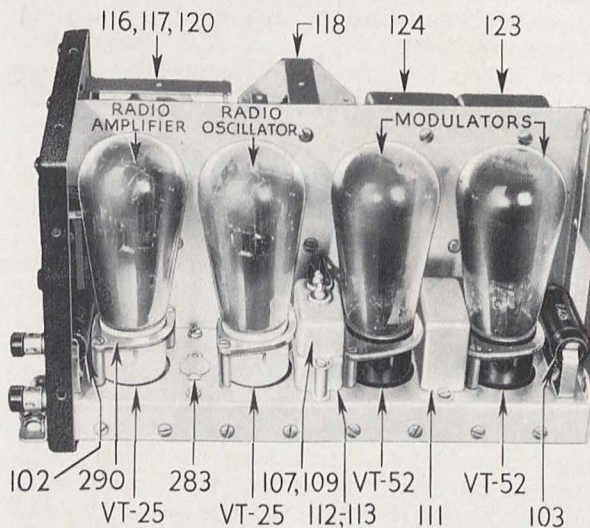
RADIO TRANSMITTER, TYPE BC-AH-230; SIDE VIEW WITH CASE REMOVED
